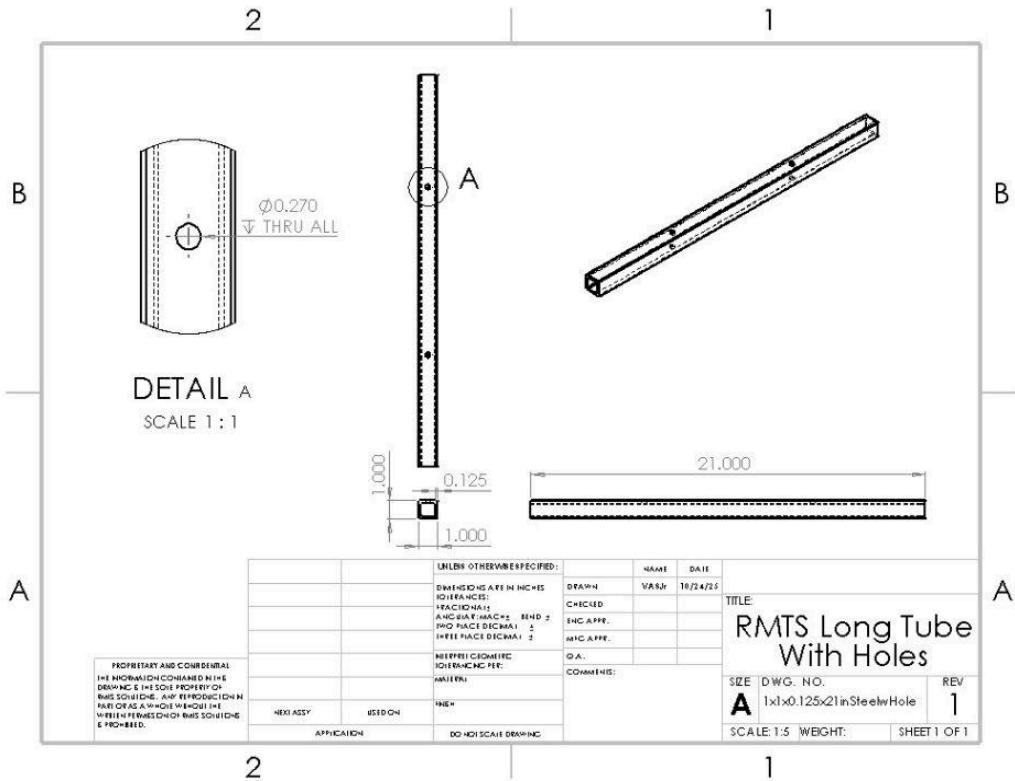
Figure X: Drawing of 1"x1"x1/8" square steel tube cut to 21 in with mounting holes
